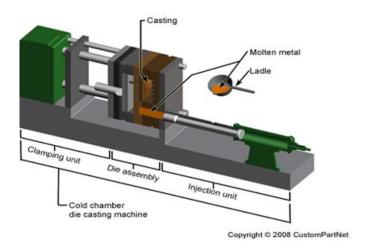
Cold chamber die casting machine. (Ali Abbas Khan 2023)
